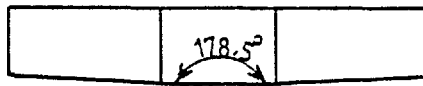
Blank-holder indenting ridge dimensions suggested by Bosch and Stager.
